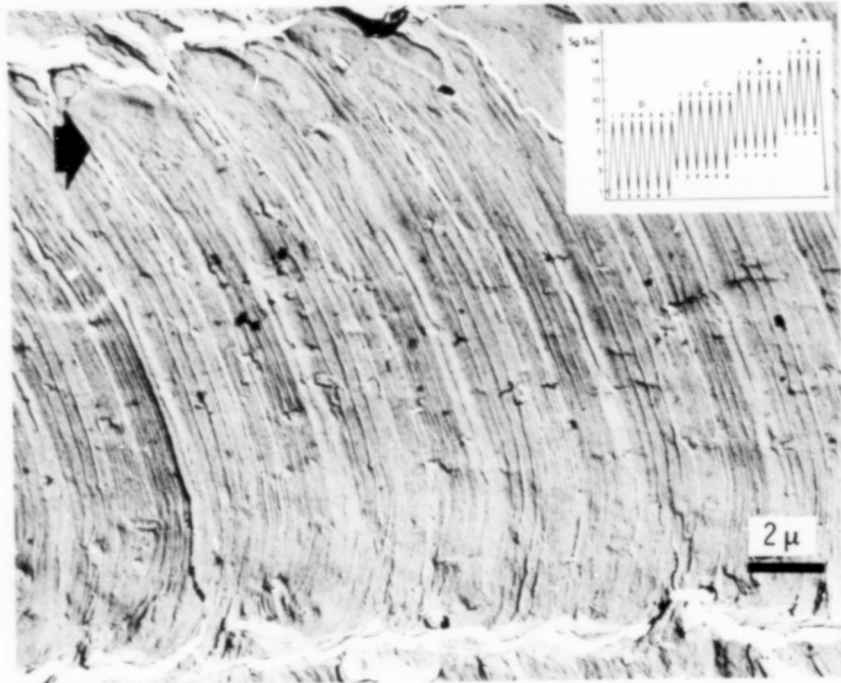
Typical fracture surface due to Program P7 ($2a = 1.7$ inches).
